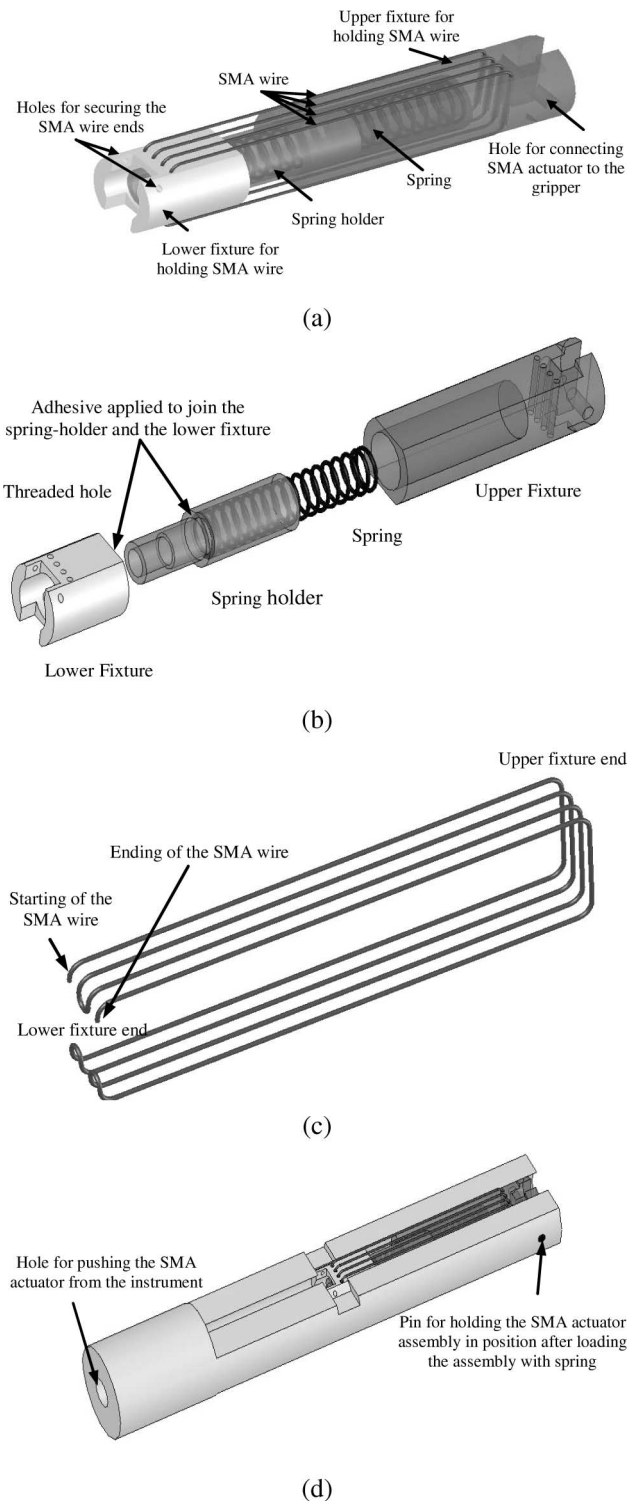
Details of the SMA actuation stage of the second-generation design prototype. (a) CAD model of the SMA actuator stage. (b) Exploded view of the SMA actuator stage. (c) Weaving path of the SMA wire. (d) SMA weaving instrument.
